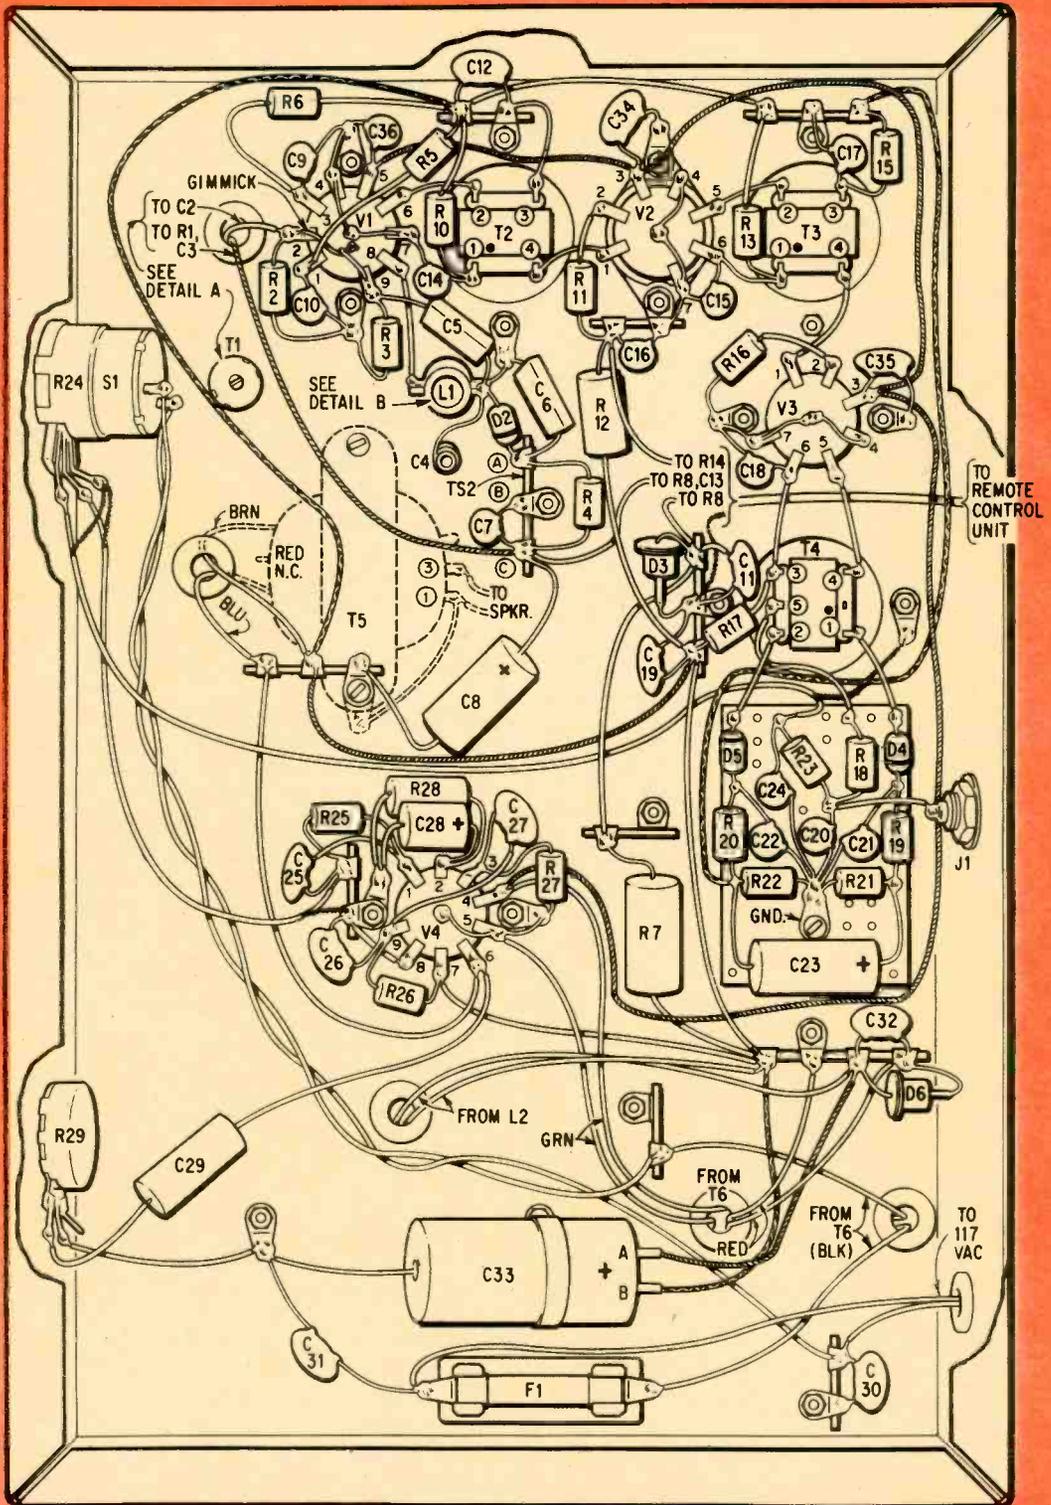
Underside of receiver. Parts placement at top and down to T4 is critical. Ratio-detector circuit is built on 2¼ x 1½-in. piece of perforated board which is mounted on spacer at right. T5 is on top of chassis.
